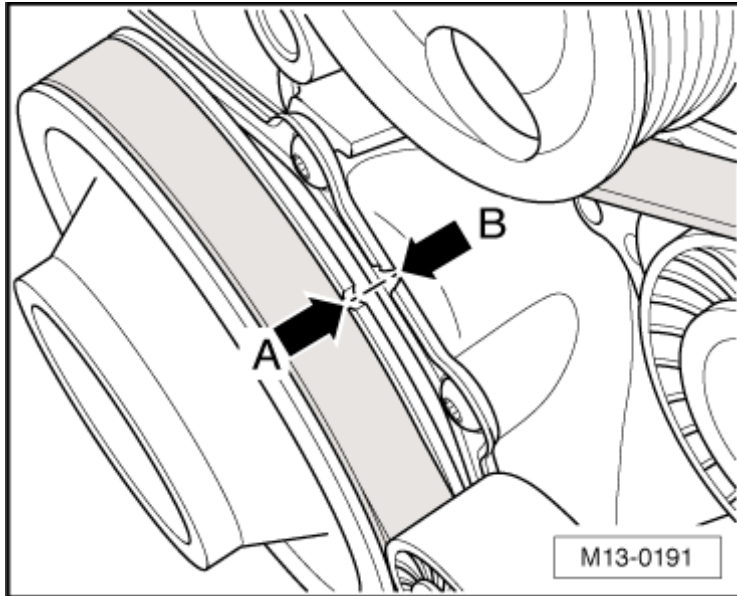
Identifying Belt Pulley And Sealing Flange At TDC
